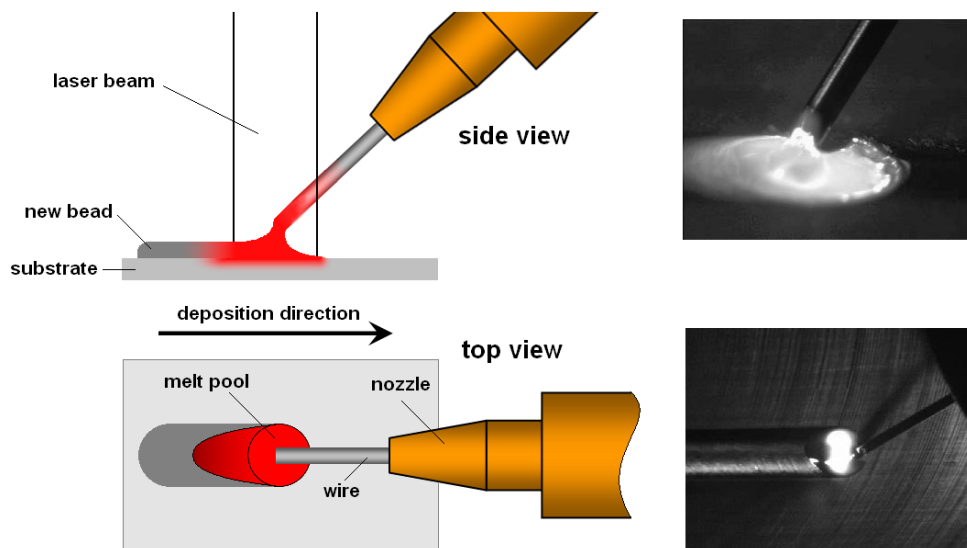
Left: Illustration of the laser-wire interaction. The molten metal solidifies into a bead by relative motion of the welding tool and the substrate. Right: Top- and side view images of the real process.
